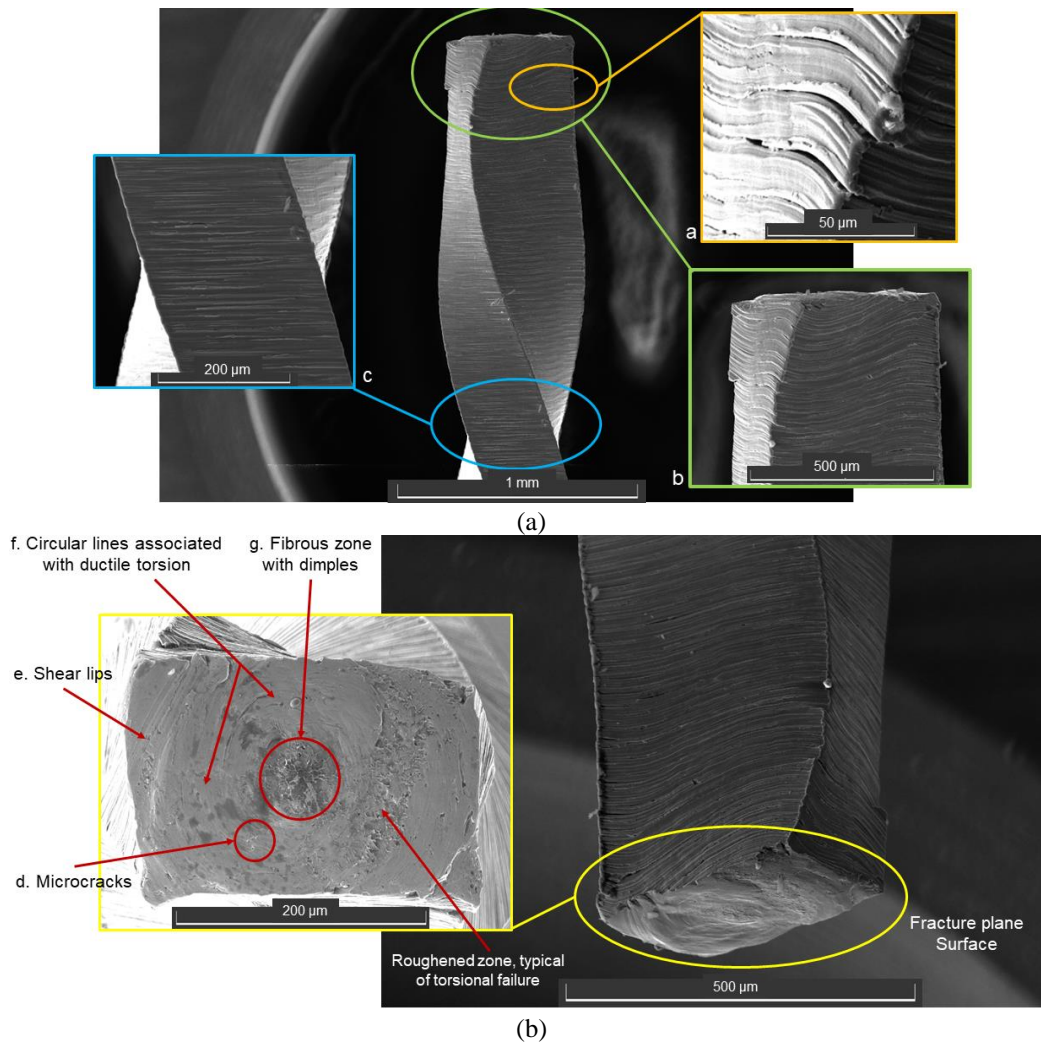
SEM images of WOG. Top: Longitudinal view, (a) section near the fracture, (b) shear band, (c) undeformed machining lines. Bottom: Cross-sectional view of the fracture plane: (d) microcracks, (e) shear lips, (f) concentric marks, (g) dimples.
